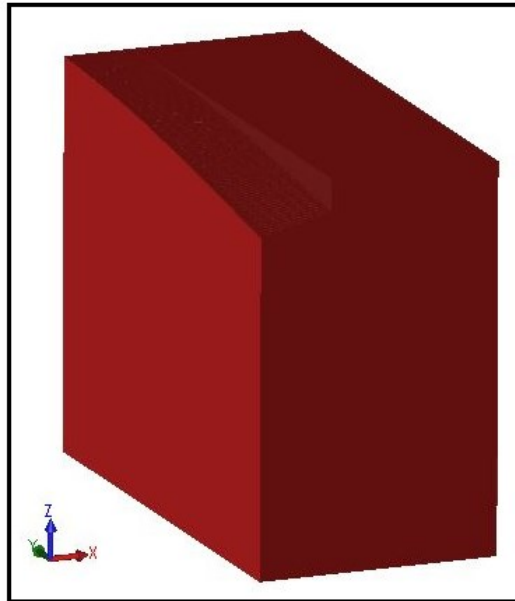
Output of part 1 using 3-axis machining simulation.
